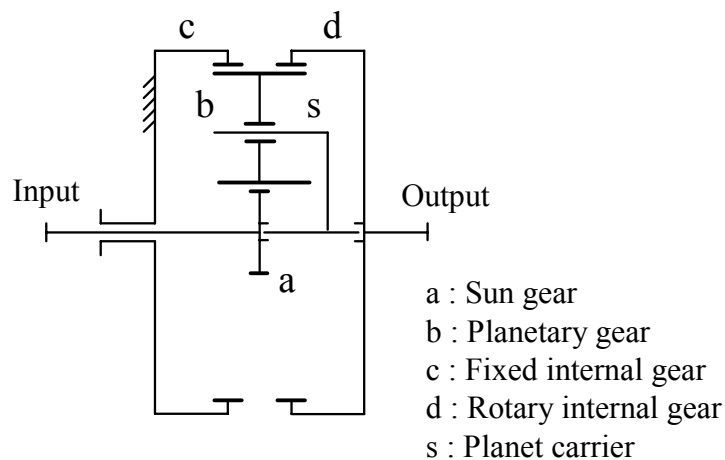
Configuration of 3K-type mechanical paradox planetary gear drive
